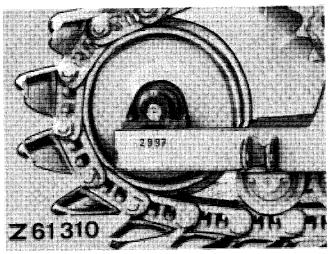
Serial Number of Track Assembly, L.H. Side
